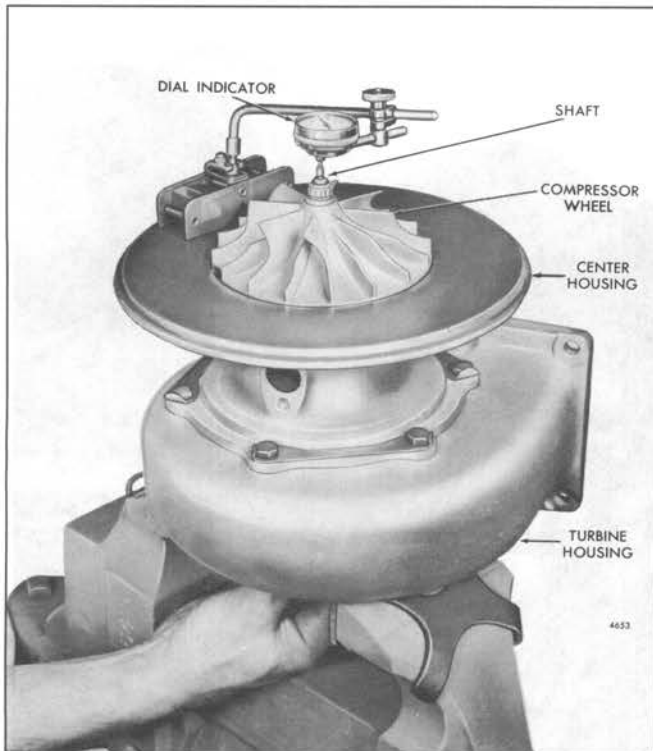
Checking Shaft End Play using Adaptor J 21224
